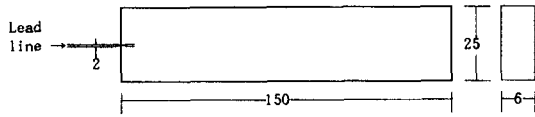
Dimension of counter electrode test specimen(unit:mm).
